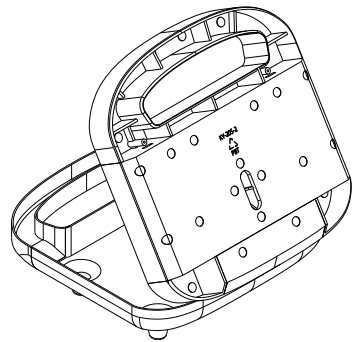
Prototype line drawing, from a 3D model used for 3D printing
